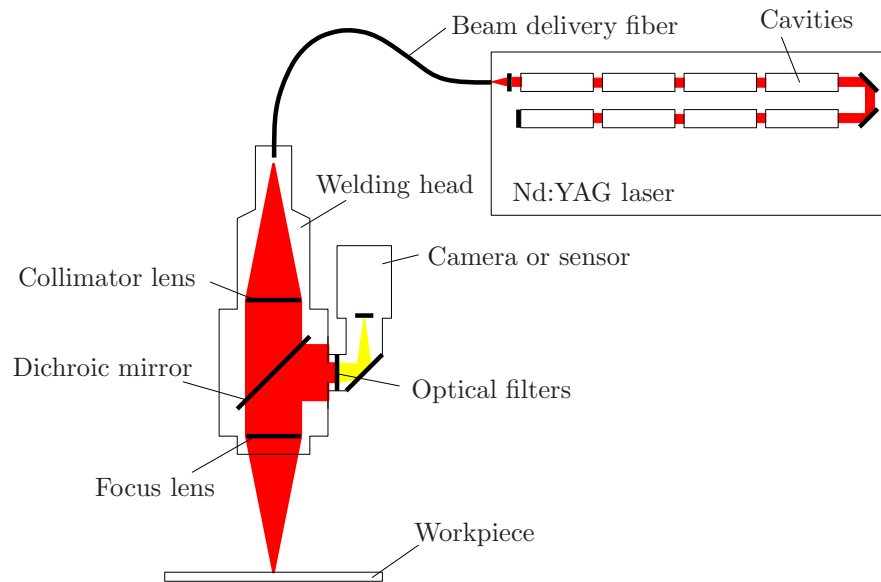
Schematic overview of a typical laser welding system.
